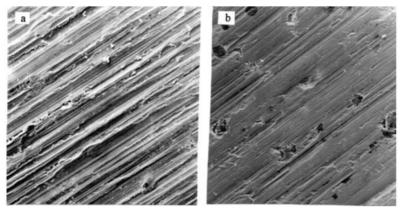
Technological surface of cast iron EN-GJSF: a) after grinding, b) after burnishing with the force P = 4000 N. Enlargement 200 x
